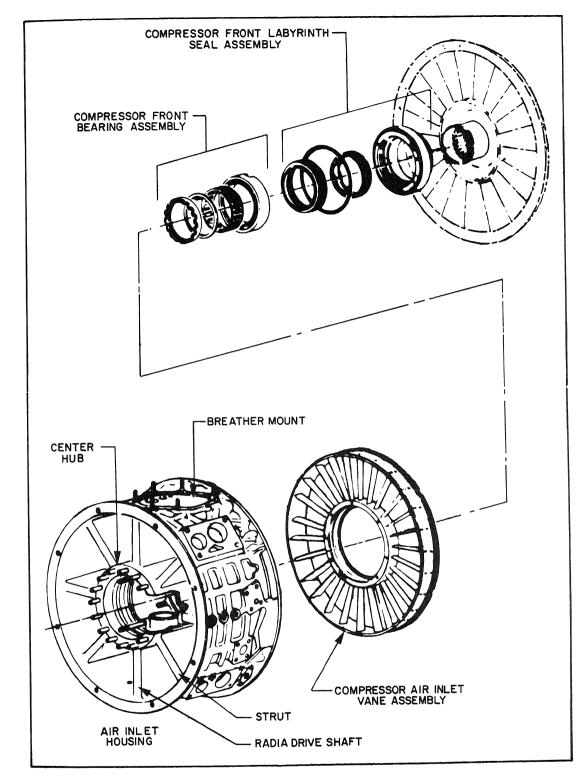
Air inlet housing, inlet guide vanes, and compressor front frame.
